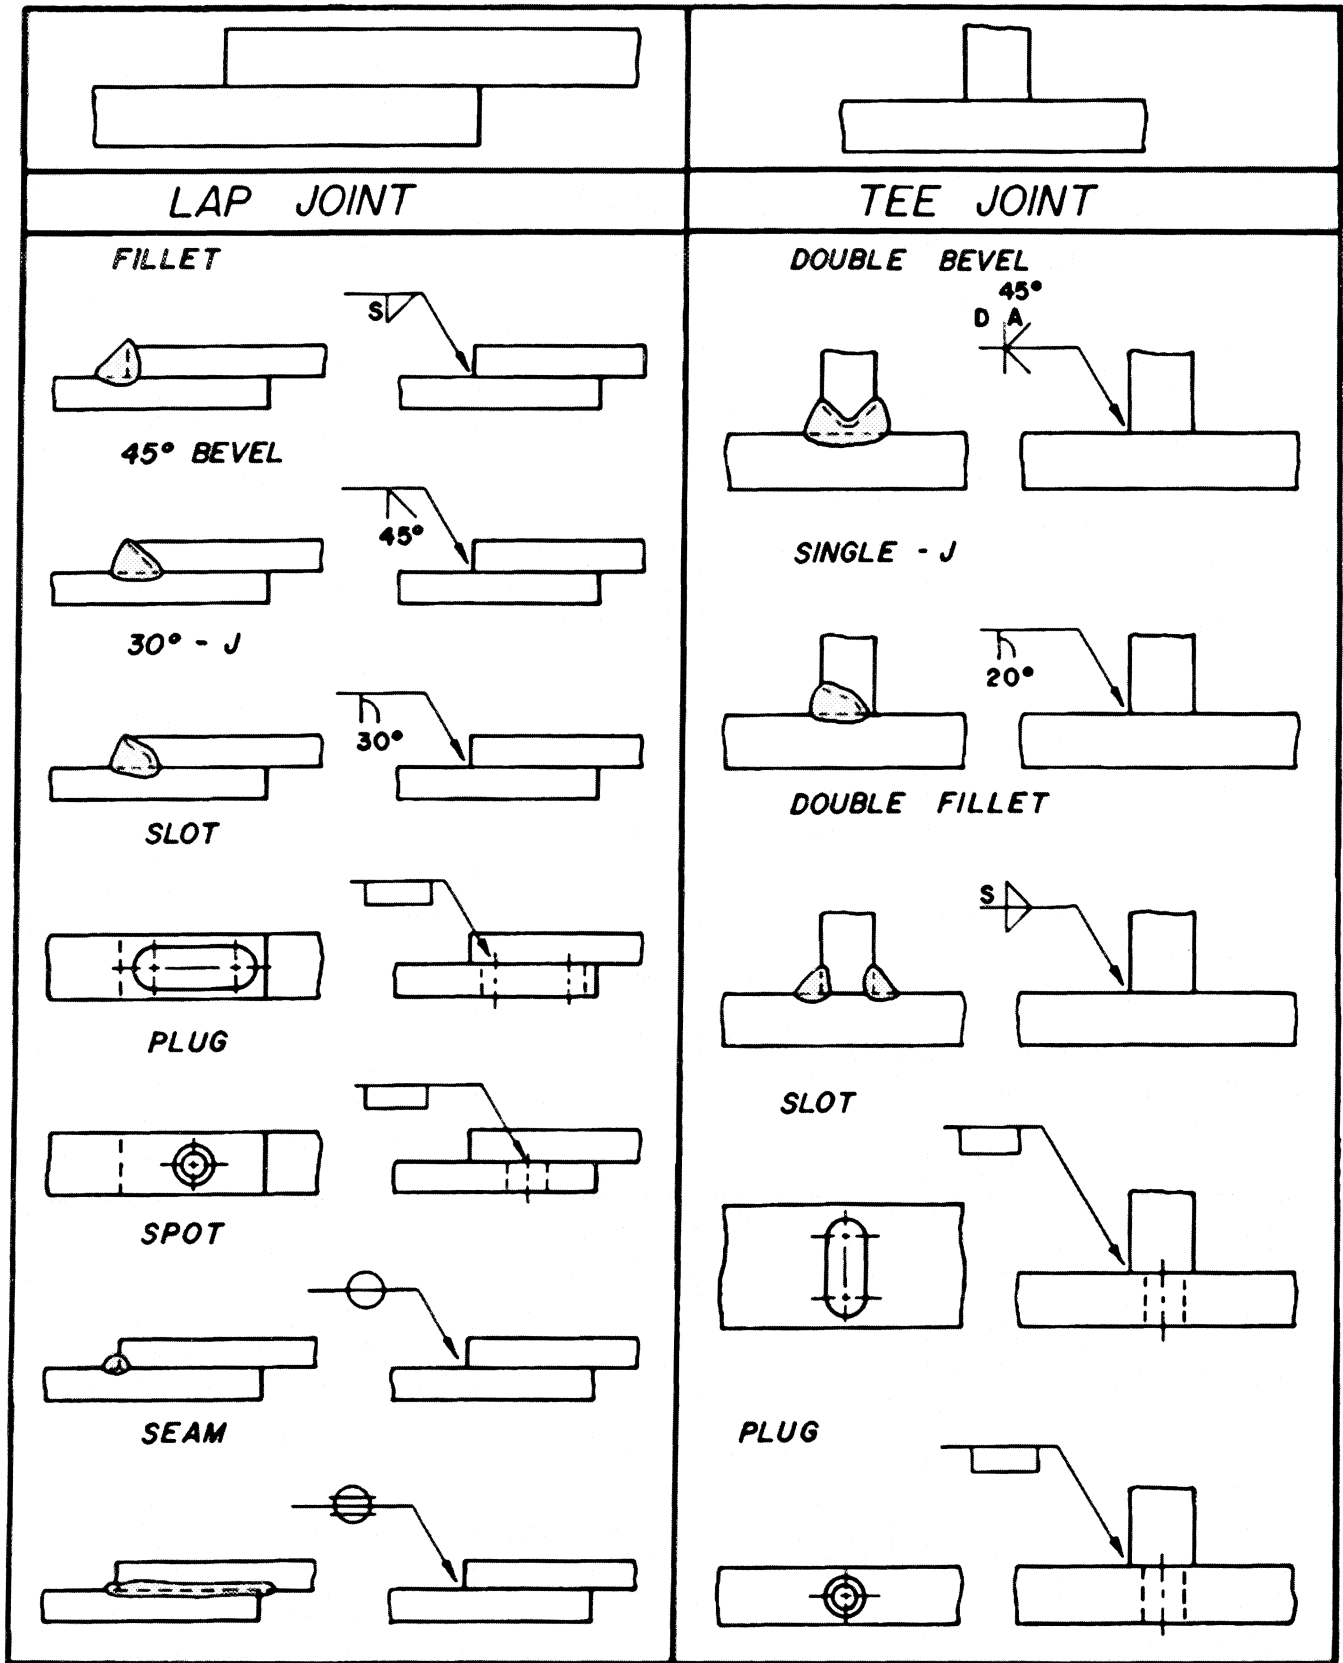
Joints and Appropriate Welds—Continued
